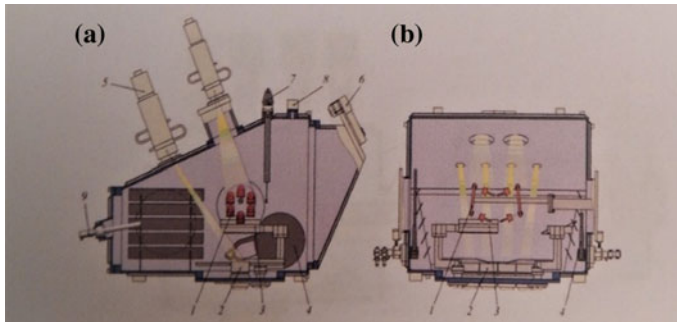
Schematic of TBC technological process in unit L-8 a cross-section view, b longitudinal view, 1-holder with blades, 2-crucible, 3-evaporator gate valves, 4-lock gates valves, 5-electron-beam gun, 6-viewing system, 7-load cell, 8-process gas leak valve, 9-ball lead for pyrometer mounting (From The Paton Welding Journal, No. 5–6, 2016. Used with permission)
